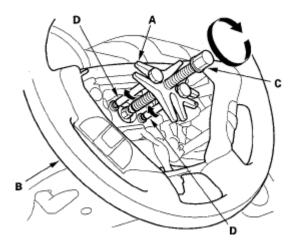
Turning Pressure Bolt Of Steering Wheel Puller
